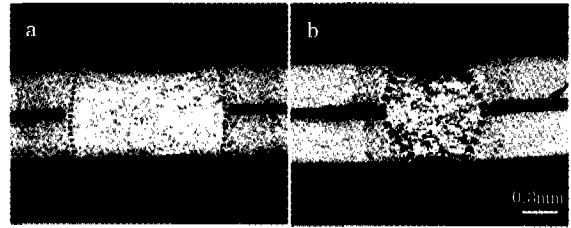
Weld cross-section showing effects of joint gap and welding speed
